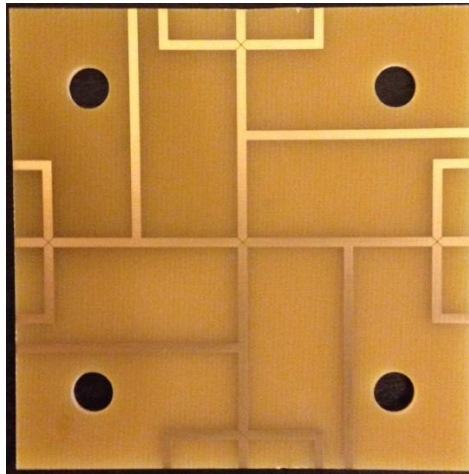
Mating Side Printed Circuit Board for Horizontal Testing
